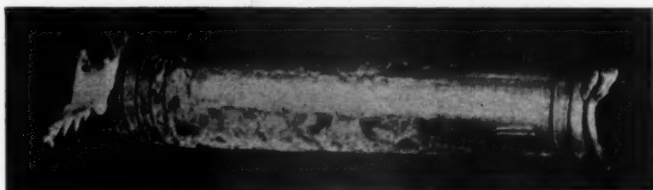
Tool marks are still visible in Monel staybolt removed after nearly 12 years of service
